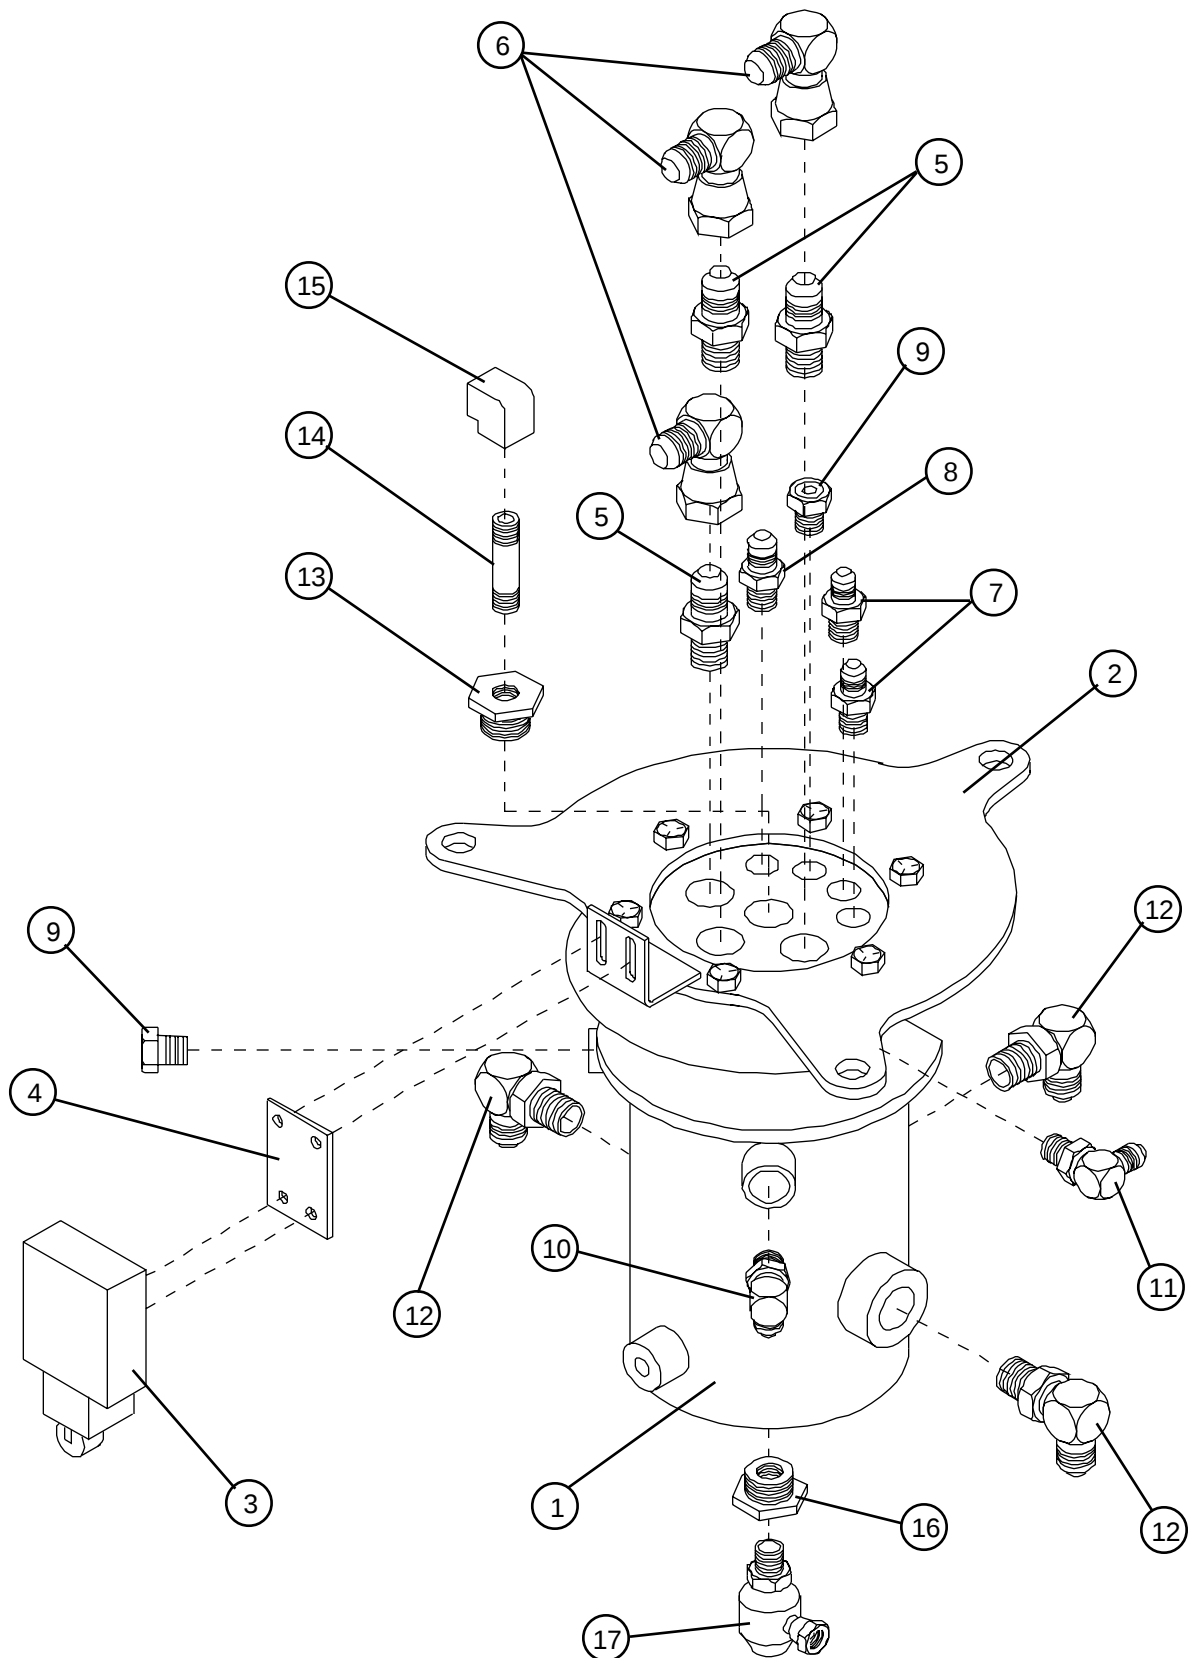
HYDRAULIC TANK ASSEMBLY
